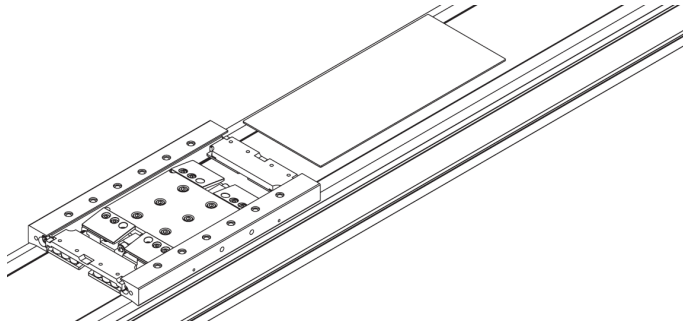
Disassembly/Assembly of cover strip deflection
